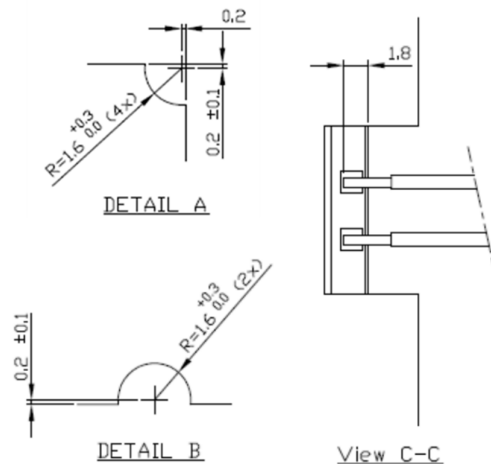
Details A and B (screw openings) and view C-C (solder orientation on PCB) of Figure 4 –integration level 2
